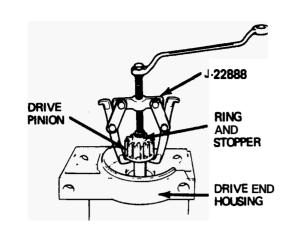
D-58 Starter Motor - Bearing Replacement and Assembly (5 of 7)
